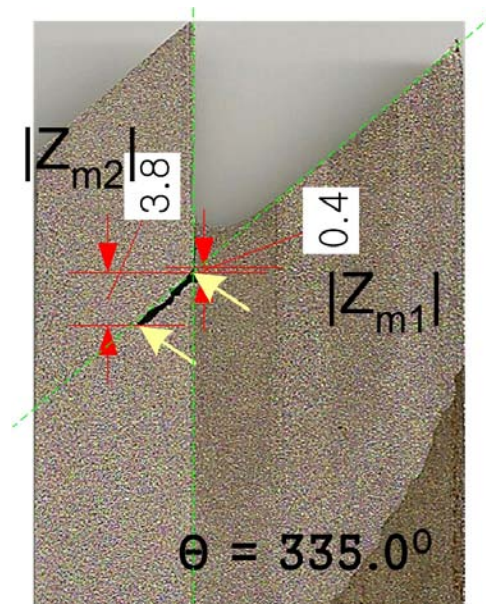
Flaw #1 Surface Crack of Pipe O.D.
